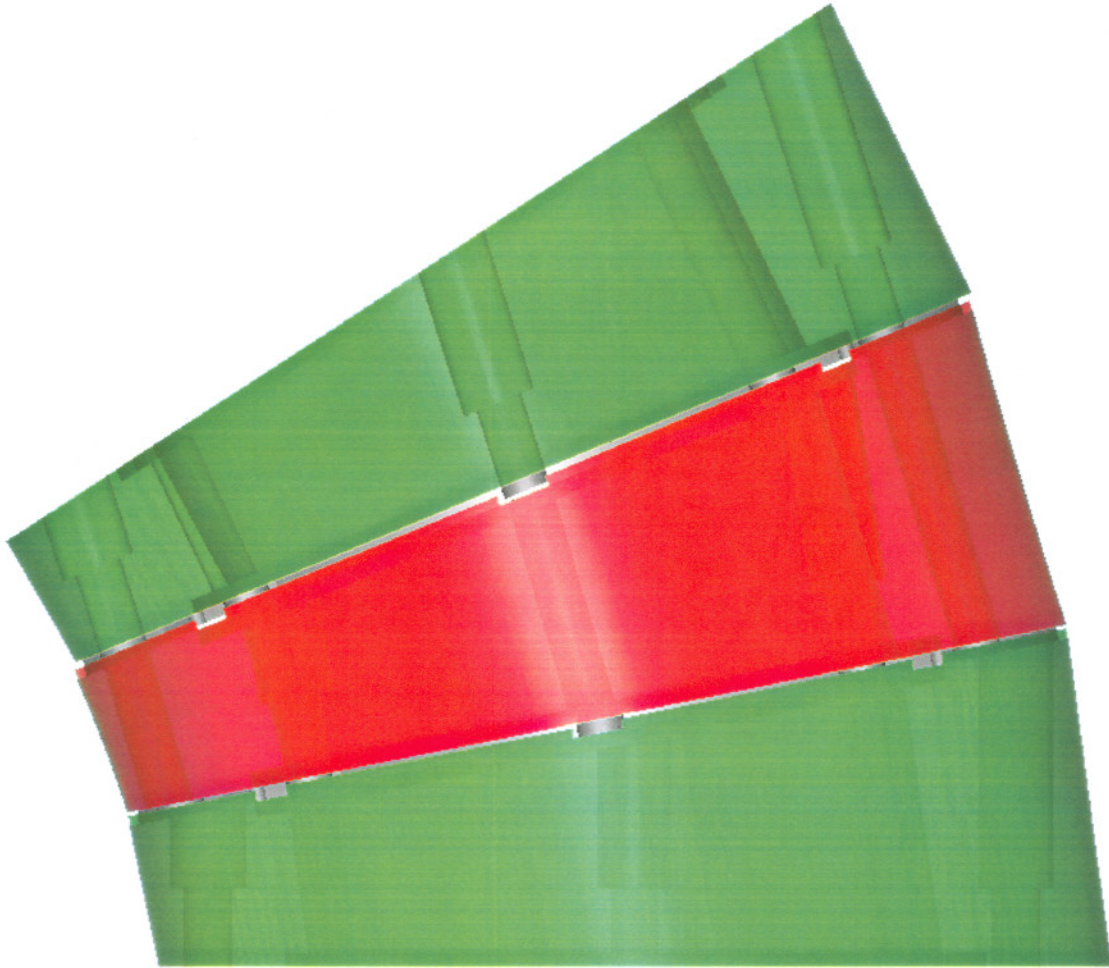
MasterCam design drawing of second curved drift tube spacer. Dimensions same as Figure 18. Notice that the bolt holes are offset by ninety degrees from the first spacer.
